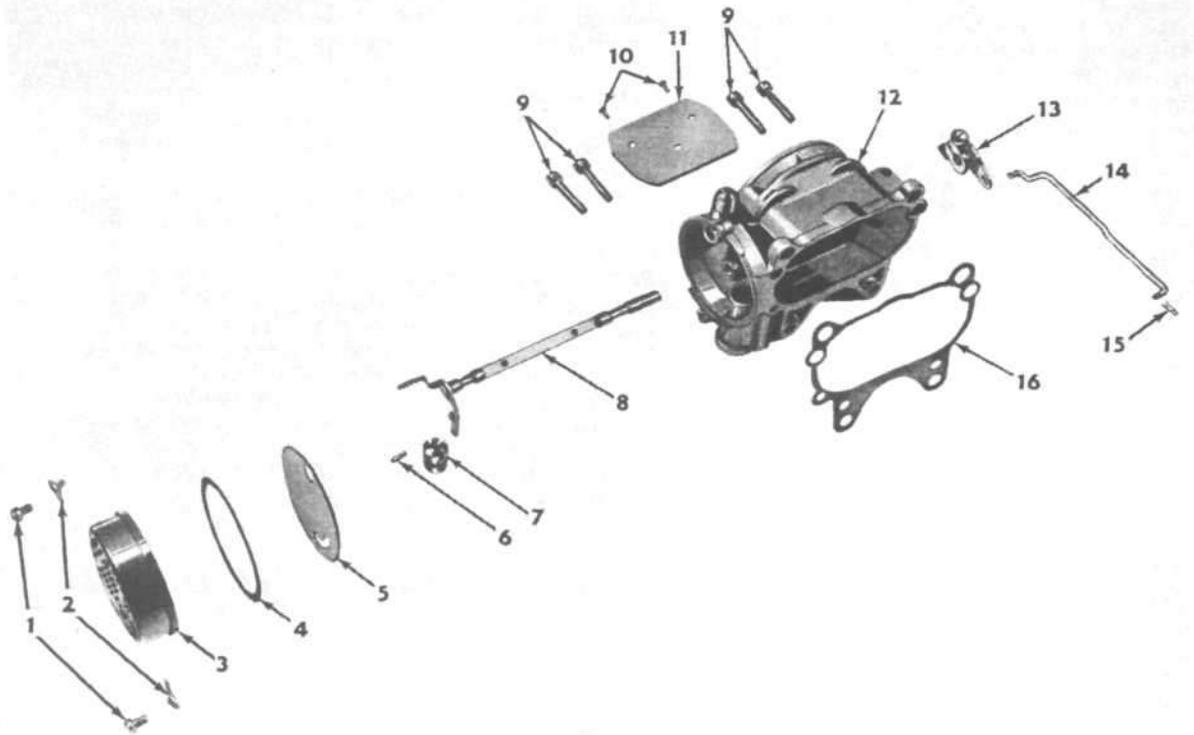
2204S CARBURETOR AIR HORN AND ATTACHING PARTS
